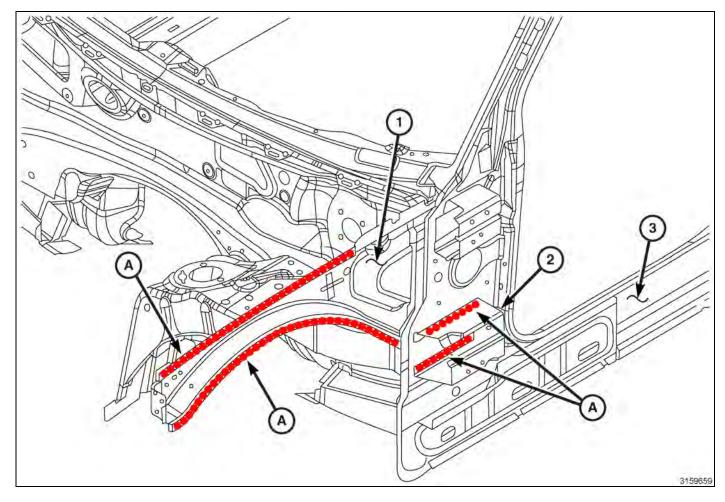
Upper Load Path Beam / Hinge Reinforcement
